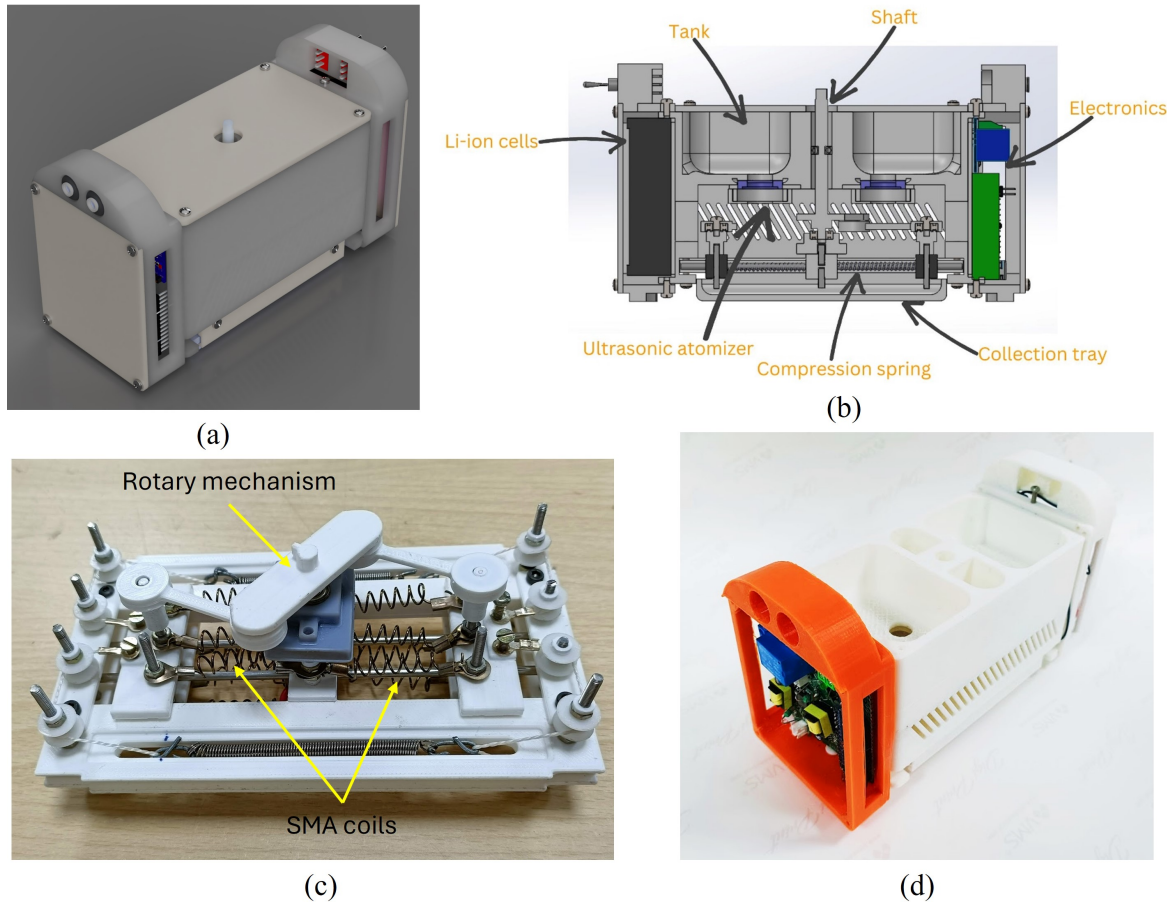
Shape memory alloy-based rotary actuation system incorporating spray cooling mechanism. (a) depicts the CAD model of the system, (b) highlights different components in the cut-section view of the actuator, (c) showcases the chassis housing SMA coils and rotary link mechanism, (d) represents the fully assembled model.
